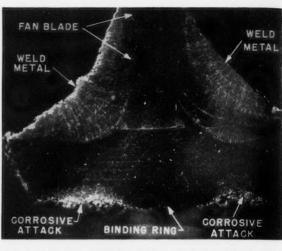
Photomacrograph showing corrosion of fan impeller. Original magnification, 8X; actual magnification after reduction for engraving purposes, 6X.
